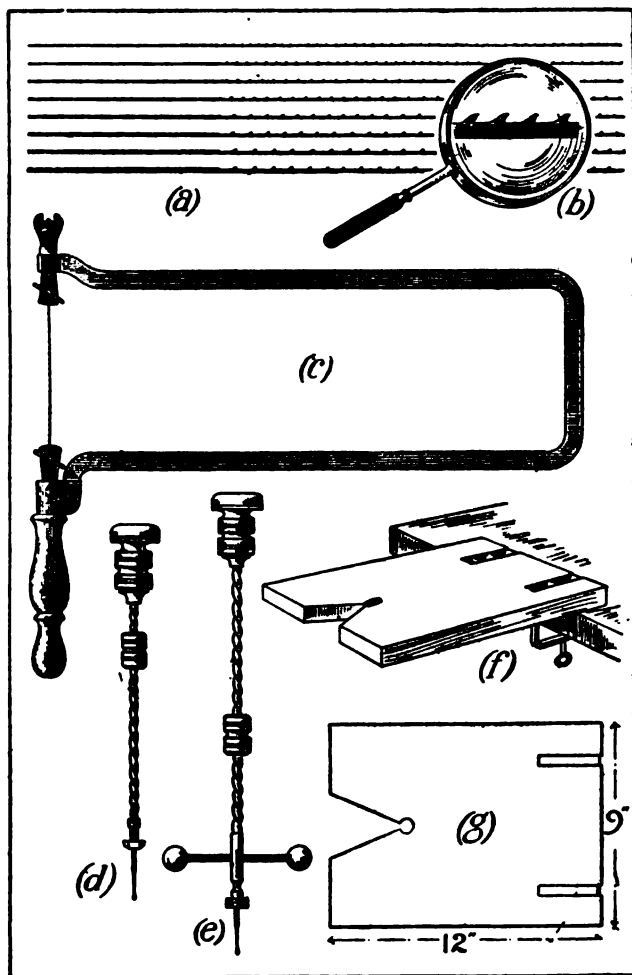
(a) Fretwork saw-blades. (b) Teeth of saw, magnified. (c) Hand fret-saw frame. (d) Archimedean drill. (e) Continuous-action drill. (f, g) Cutting table.
